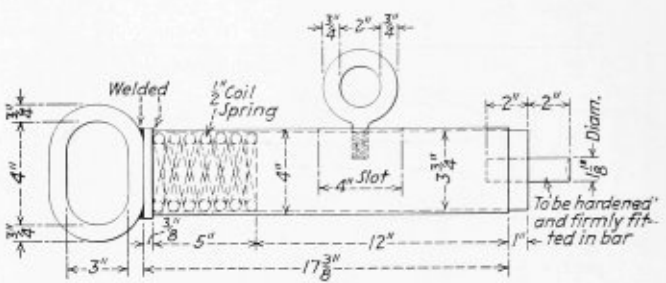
Spring bar with teet for holding on rigid and flexible staybolts
